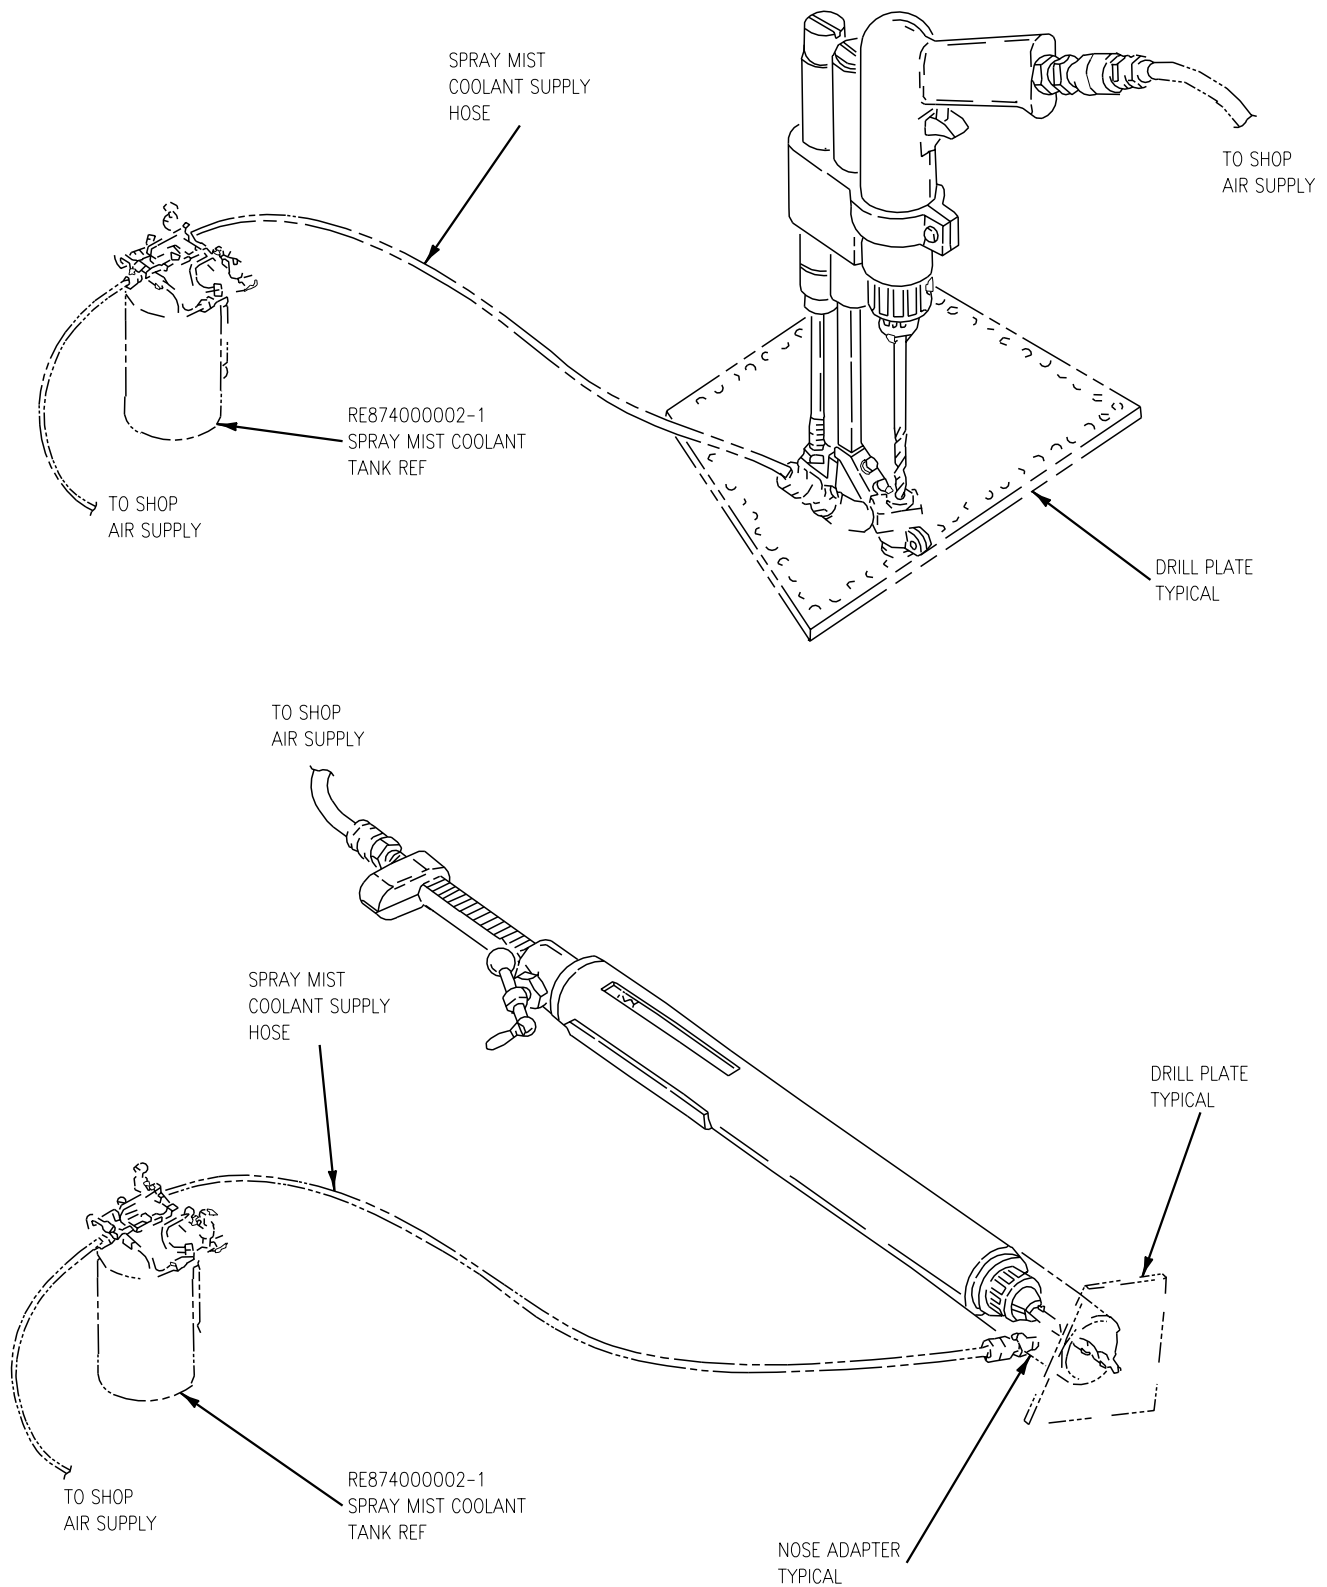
Typical Drilling Machine Setup (Sheet 1)
